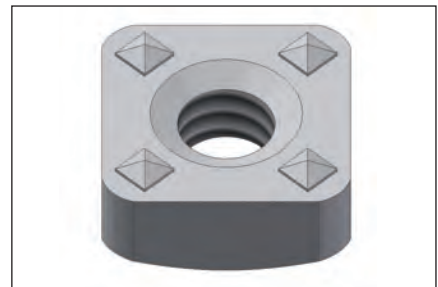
These are the pyramid-style projections carefully located for more bearing surface to achieve consistent weld results.
